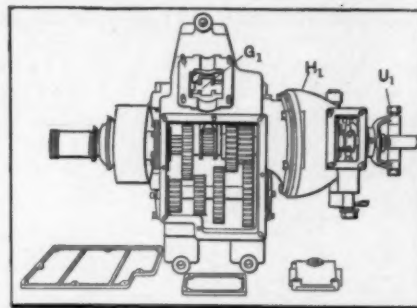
Transmission gear with clutch combined with the cover off showing details
